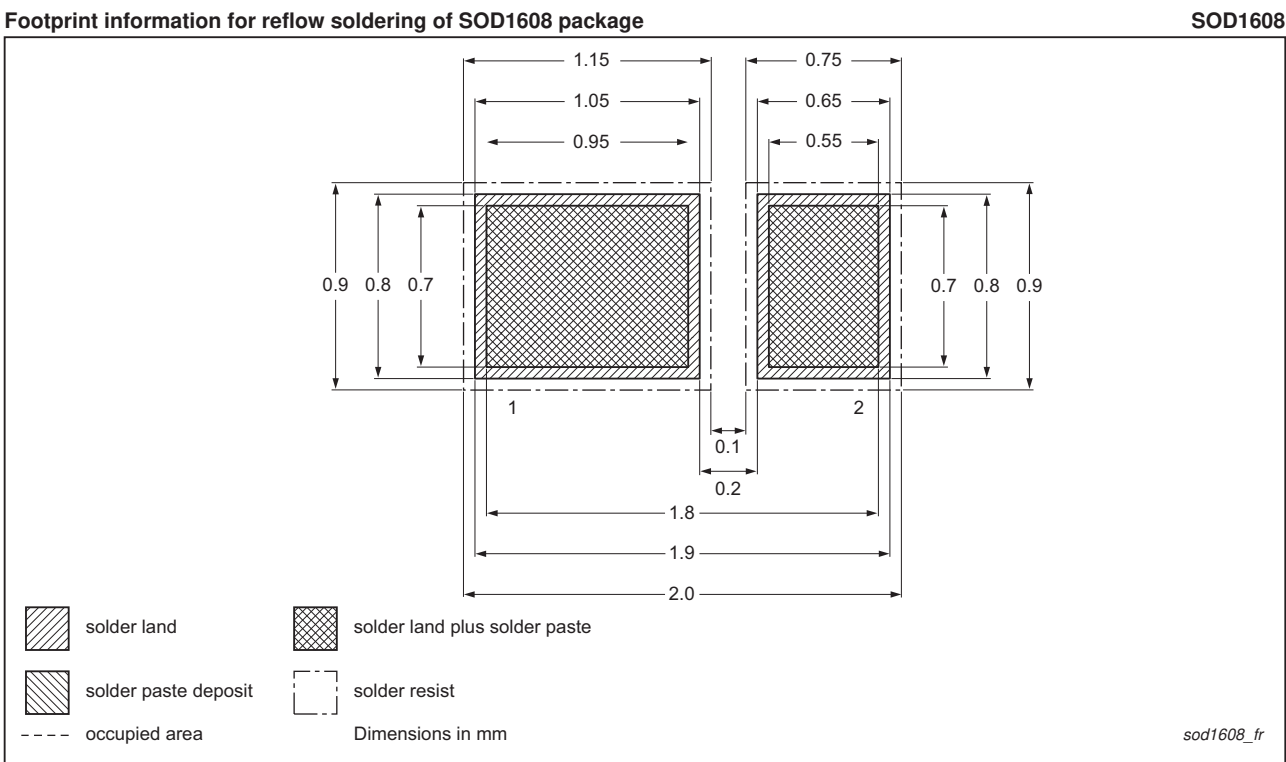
Reflow soldering footprint for SOD1608 (DFN1608D-2)
